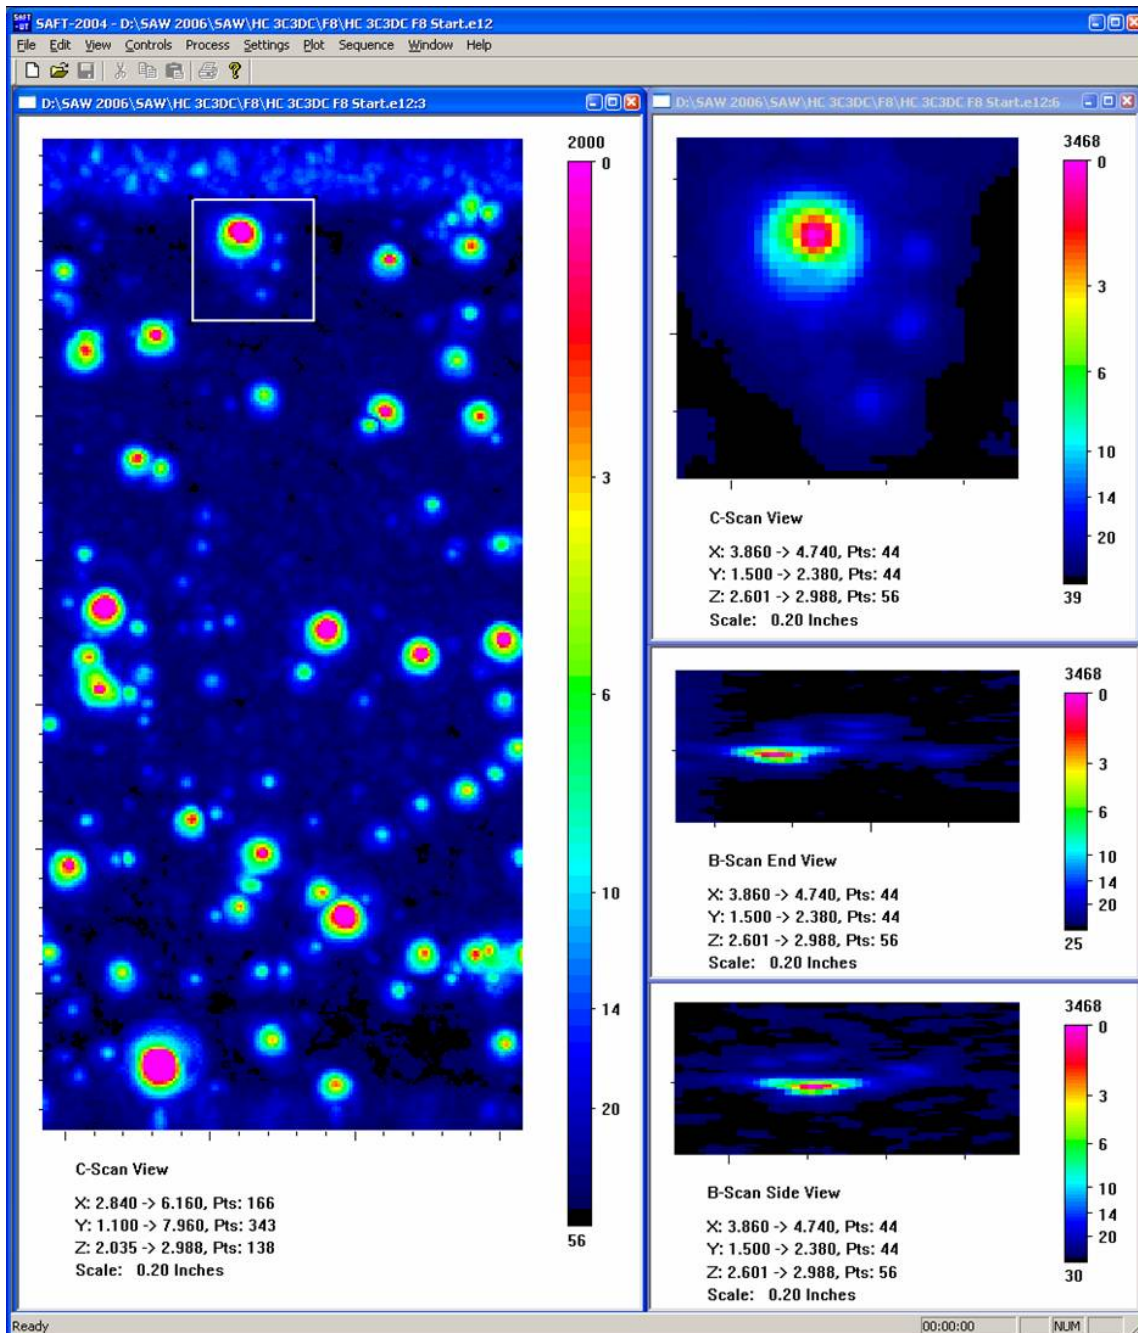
a 10 MHz F8 Immersion Testing Images of Small Fabrication Flaw: HC1A. This figure shows immersion testing data of a complex flaw indication from the weld-normal testing of large weld segments. The flaw indication is identified in the box drawn in the SAFT-UT image on the left in the figure. A close up of the flaw in the C-scan view (top right) shows 1 flaw 3.5-mm long in through-wall direction.
